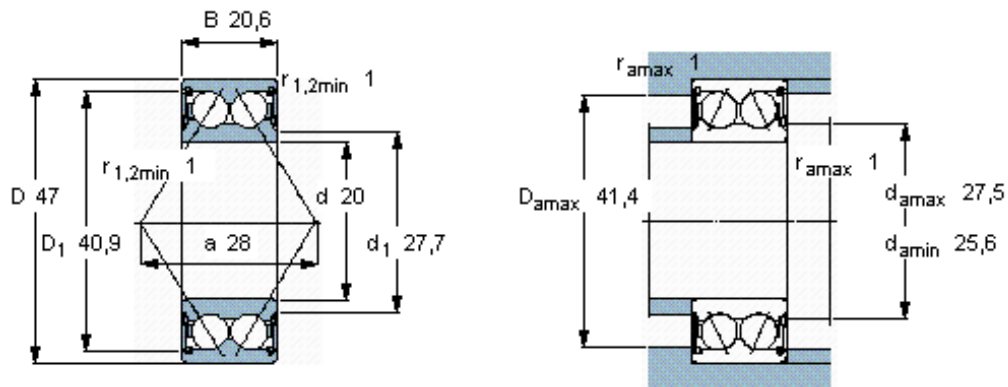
SKF 3204 A-2RS1TN9/MT33 sealed double angular contact bearing chosen for the driven pulley bearing (SKF 2009).
